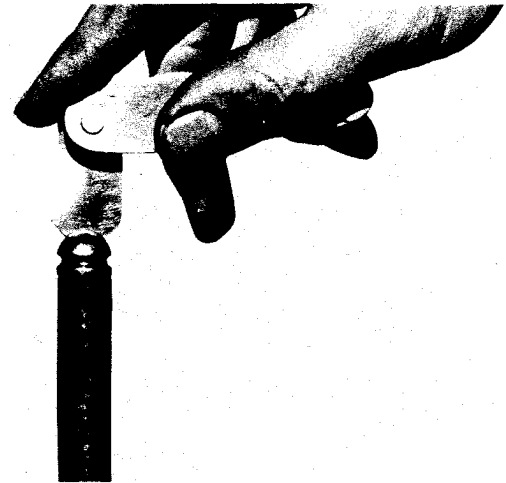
, (N20309). Checking push tube ball end with radius gauge
